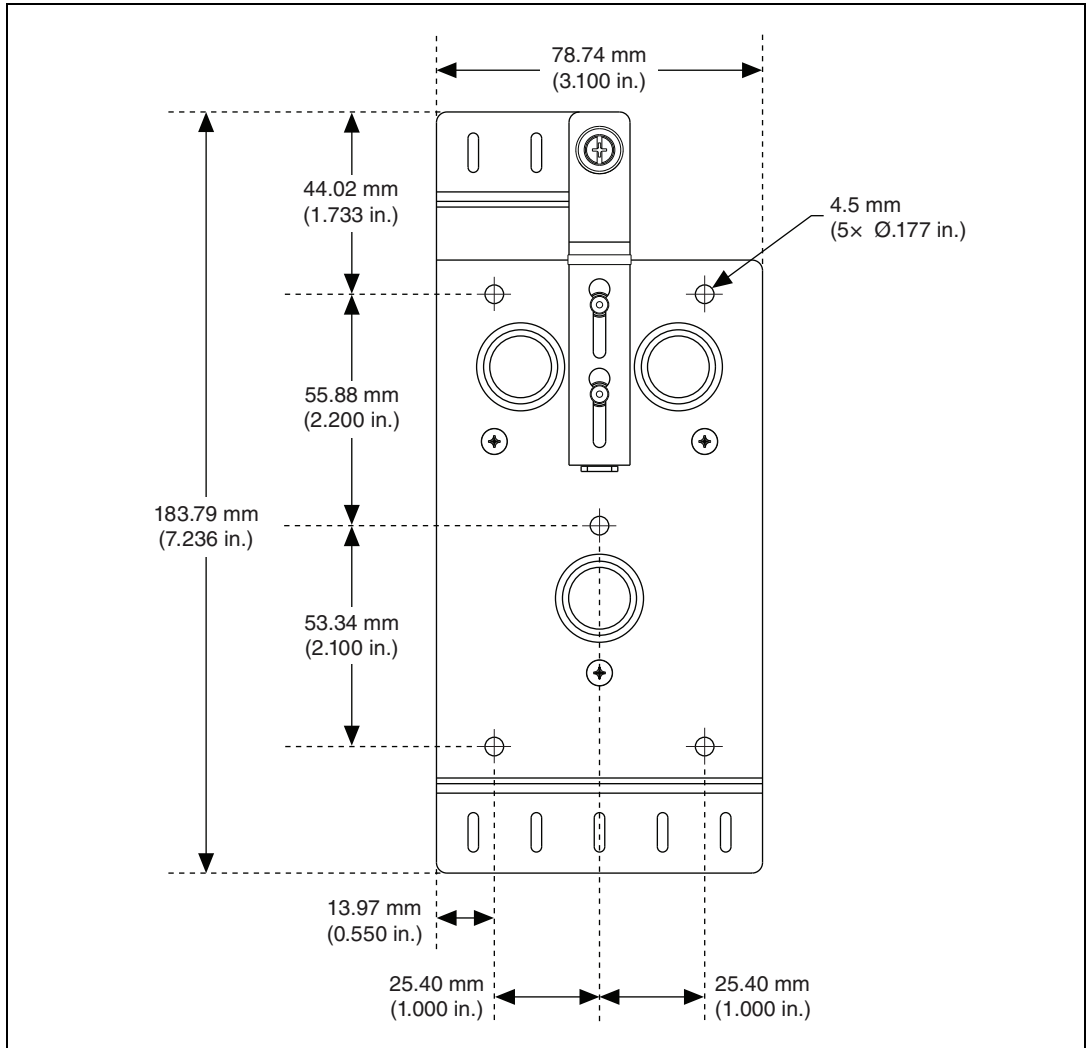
NI WSN-3212 Device Panel Mount Dimensions
